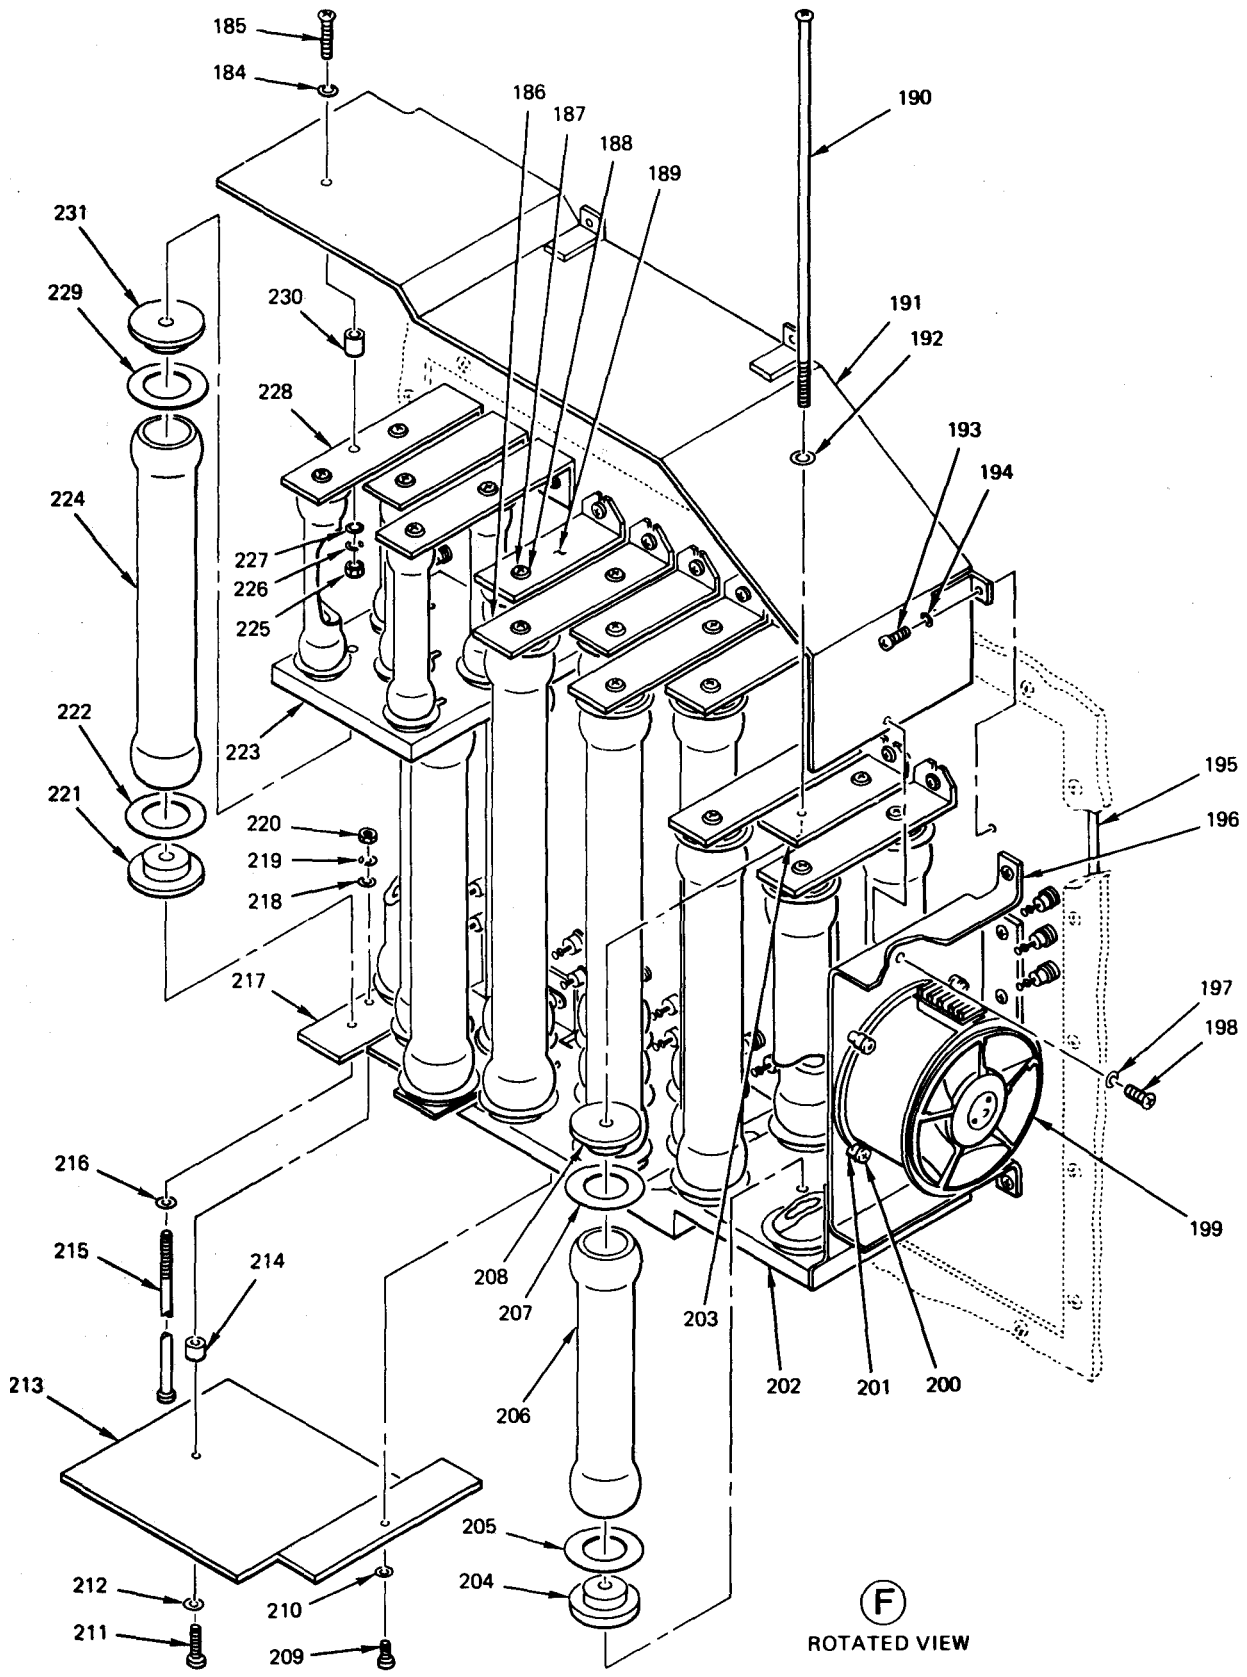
Power Supply Test Set Exploded View (Sheet 5 of 5)
